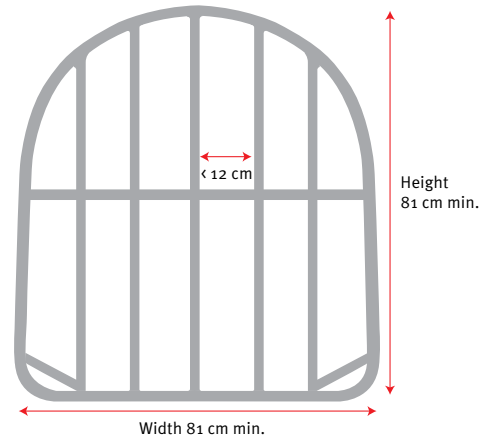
Minimum external TED grid dimensions and maximum bar spacing dimension
